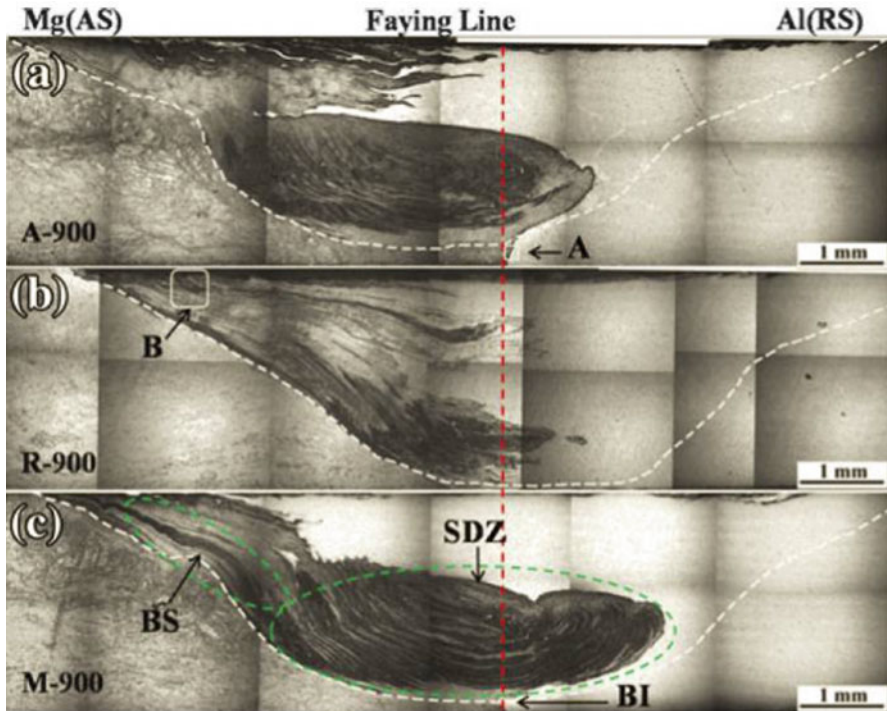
Effect of tool offset on the joint formation between Mg and Al dissimilar weld, (a) 1 mm offset toward Mg side, (b) 1 mm offset toward Al side, and (c) welding with no offset (Liang et al. 2013, reprinted with permission from Springer)
